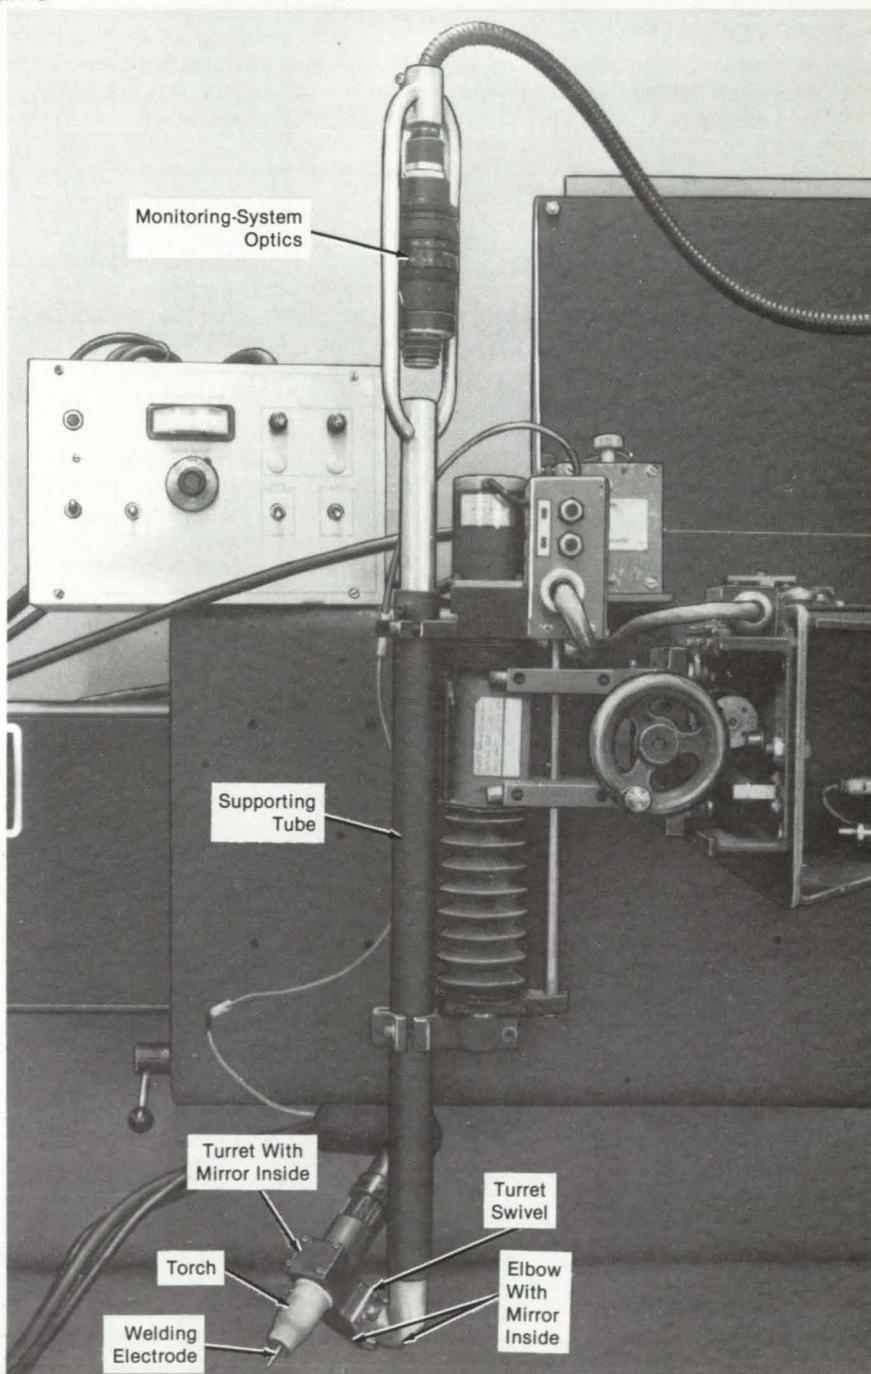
Tilted at Any Angle, an arc-welding torch still gives a clear view, through a pair of mirrors, of a weld in progress. The turret can be swiveled while the support tube remains fixed.
